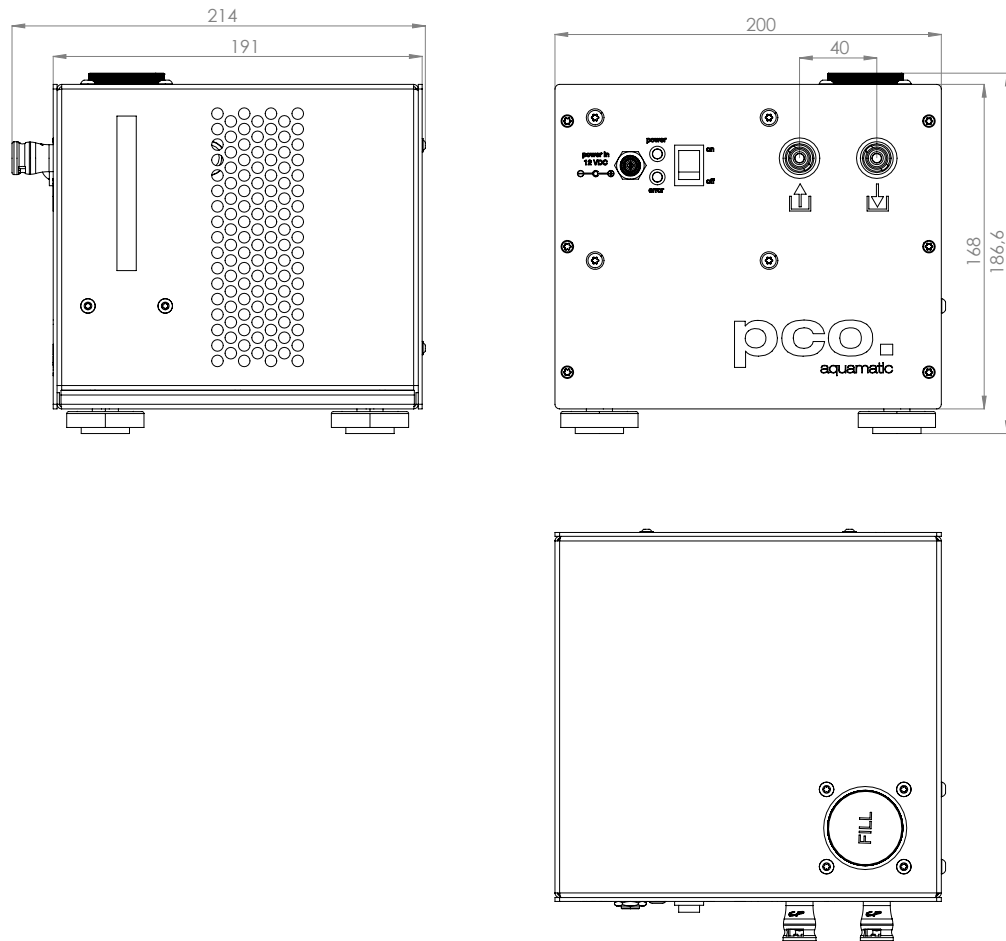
outlines of pco.aquamatic III (all dimensions given in mm).
